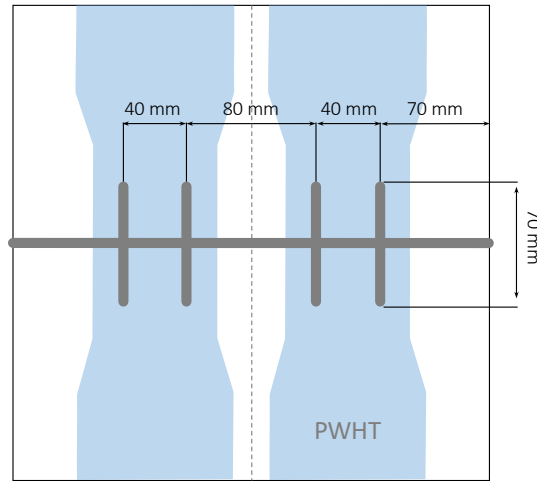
The pattern of the applied GMA cross welds.
